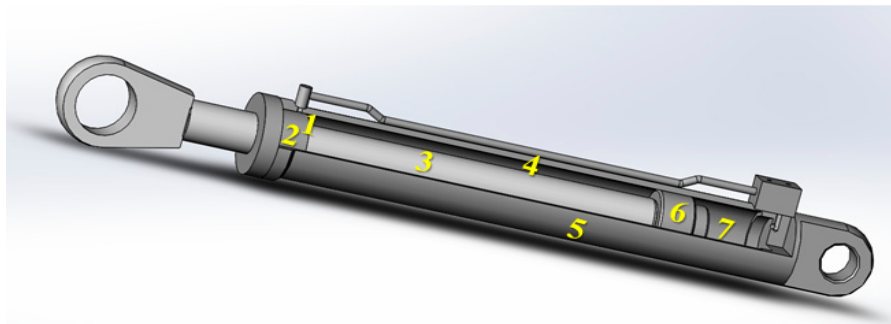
Structure diagram of hydraulic cylinder of shearer.(1) guide ring; (2) seal ring; (3) piston rod; (4) rod chamber; (5) cylinder block; (6) piston; (7) non-rod chamber.
